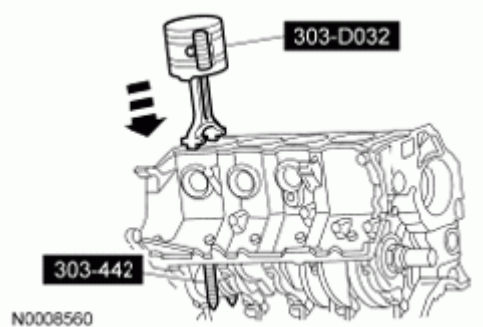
Installing Piston And Connecting Rod Assemblies Using Piston Ring Compressor And Connecting Rod Installer
